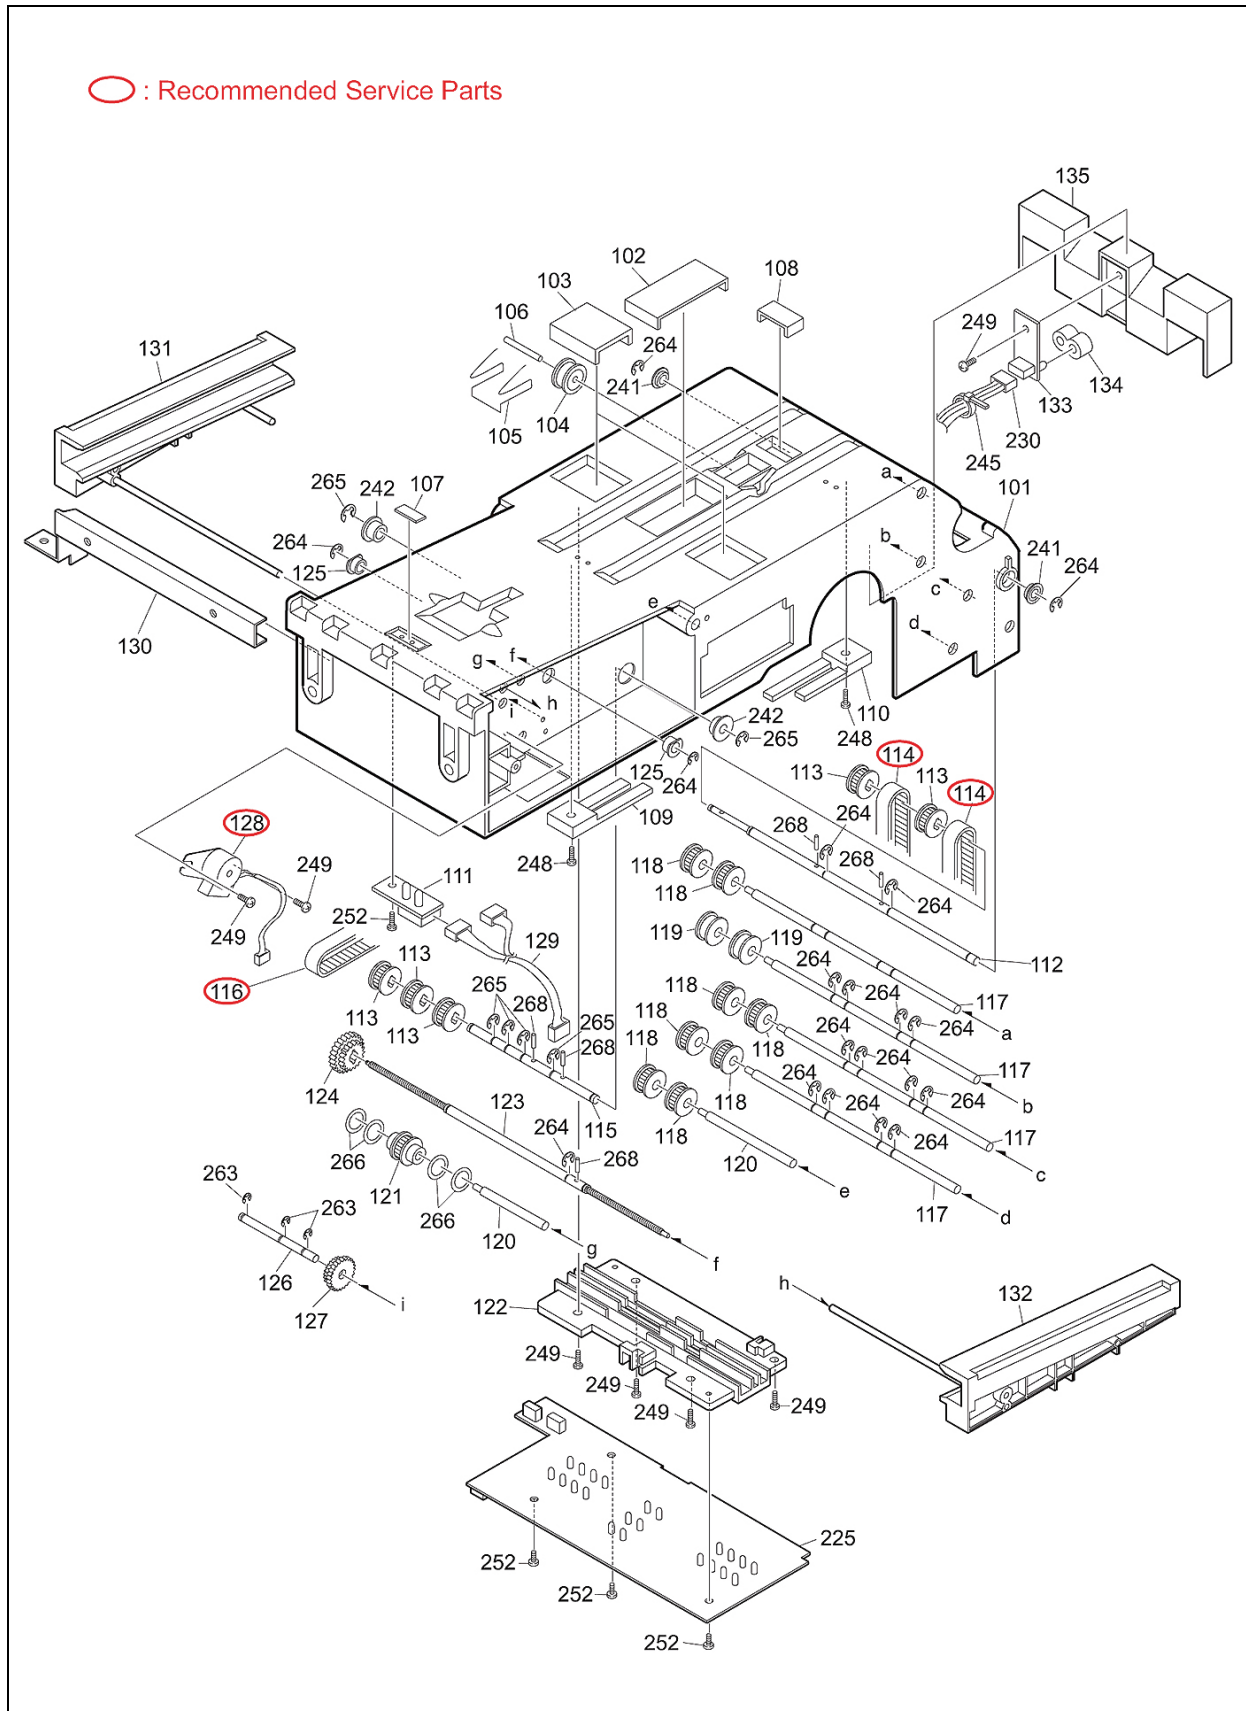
UBA Acceptor Unit Exploded View (Part 1)
